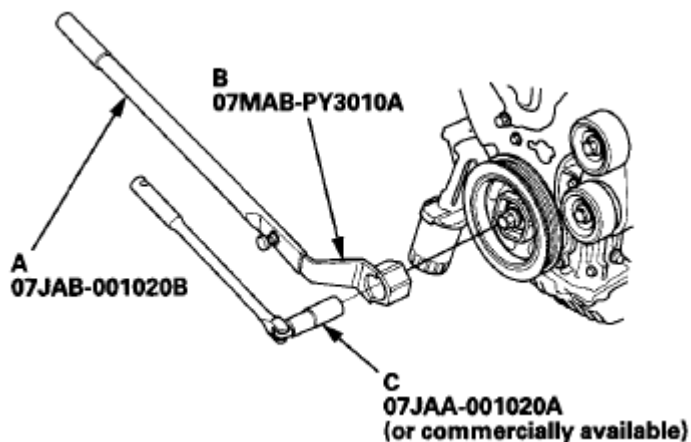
Holding Pulley With Holder Handle And Holder Attachment
